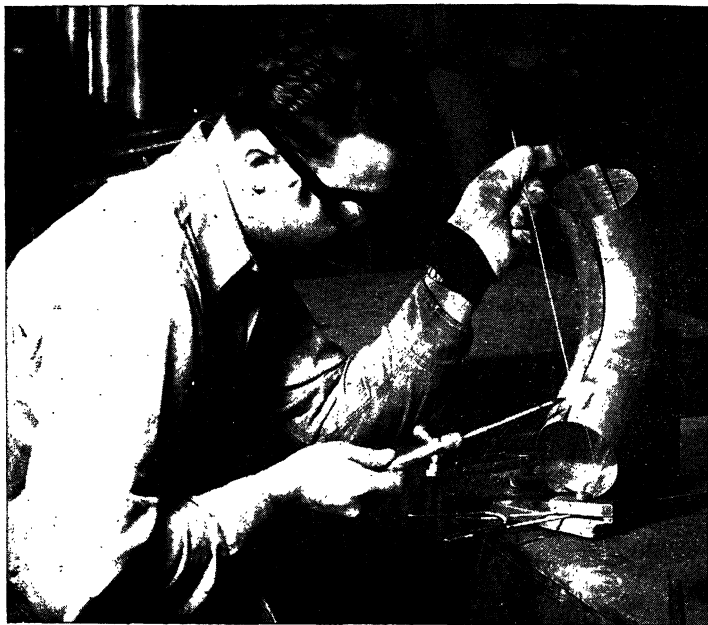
Stainless-steel welding on aircraft parts. (*Courtesy of Air Reduction Sales Co.*)
